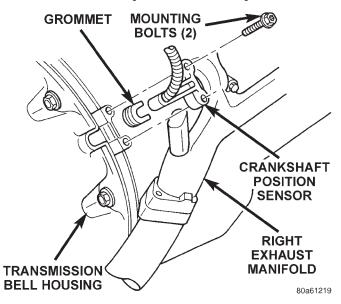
Crankshaft Position Sensor—5.2L/5.9L Engines
